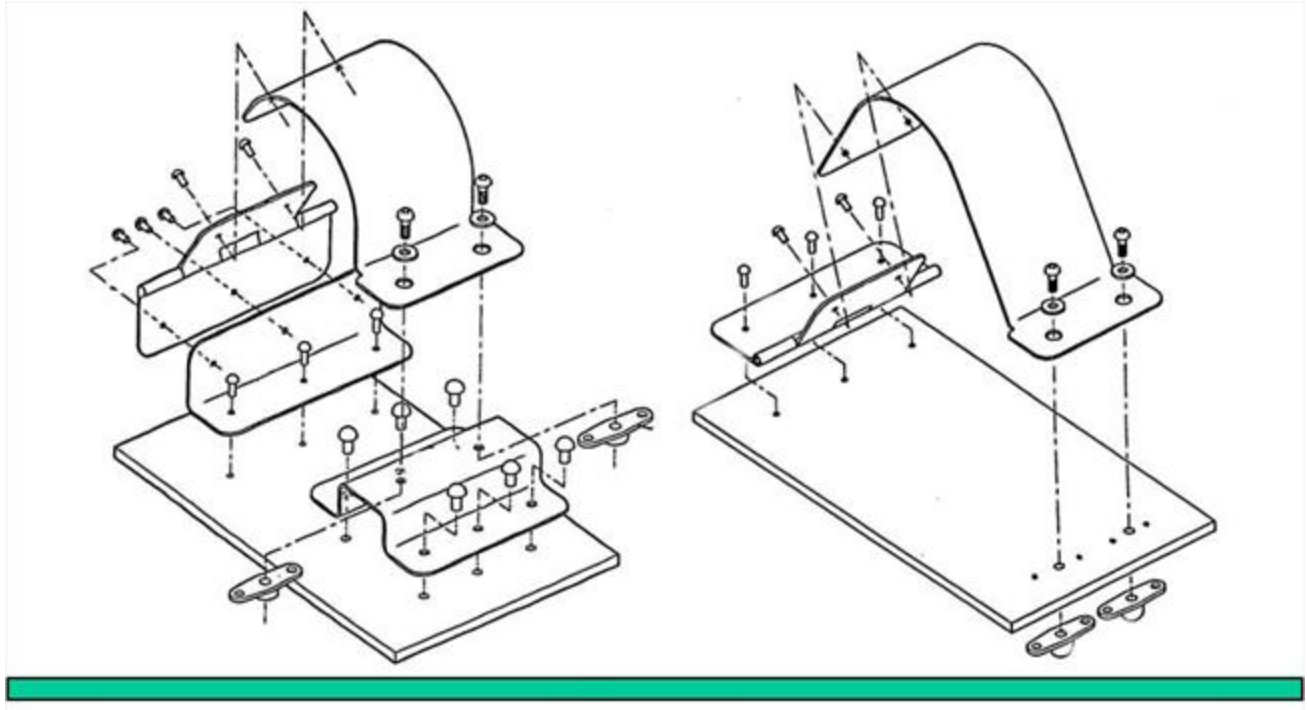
F-18 Oxygen Tank Bottle Holder
